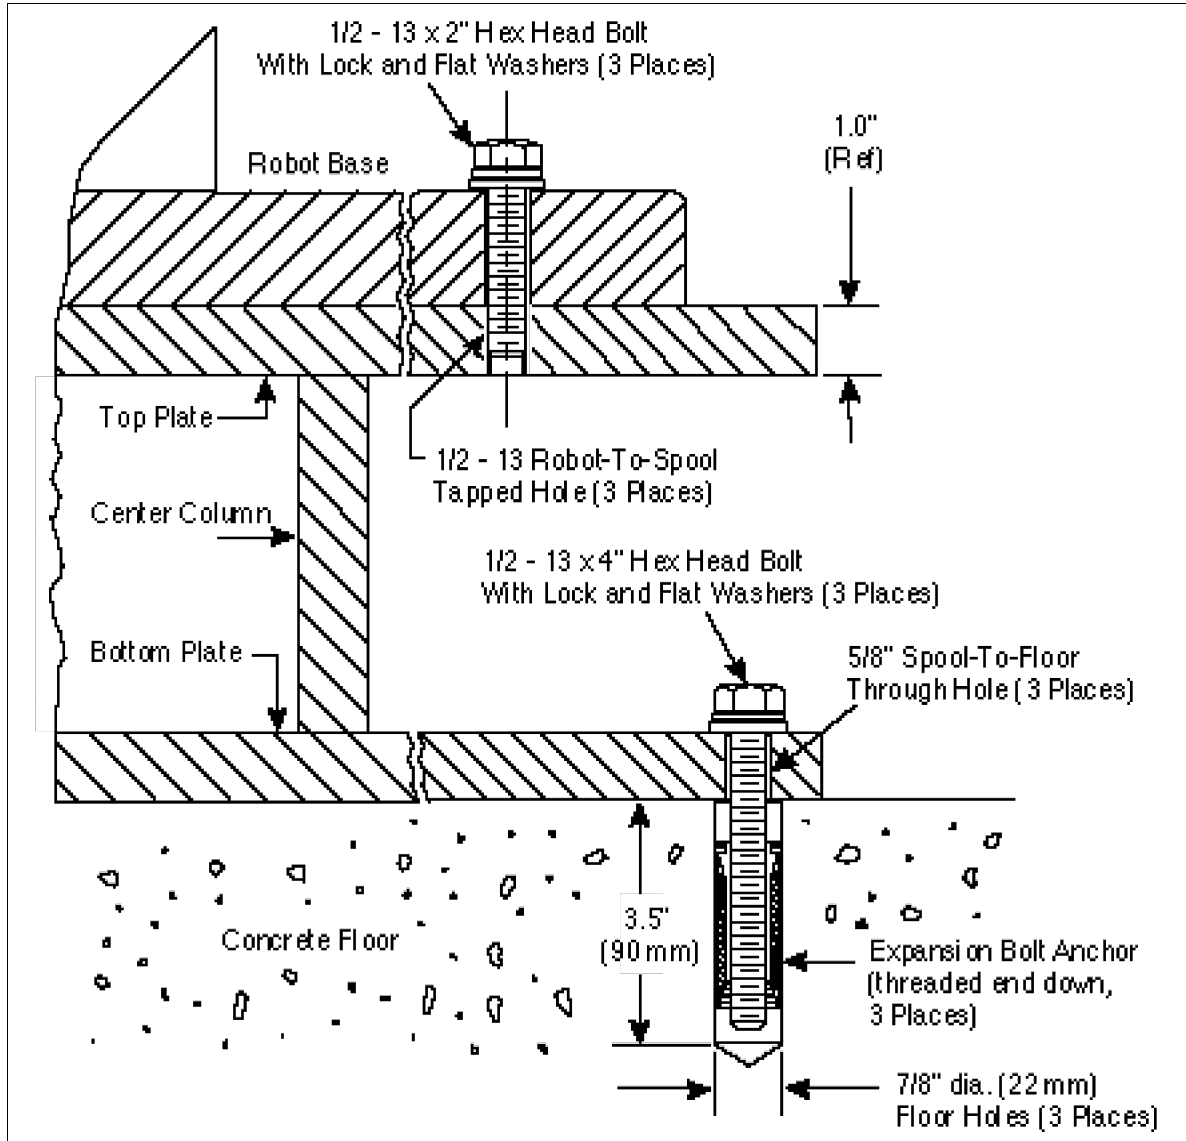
Mounting Spool-to-Floor Installation Detail
